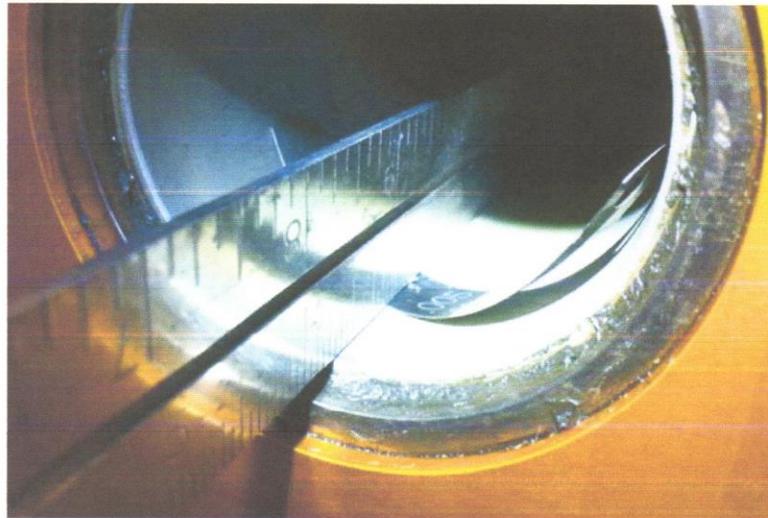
Inspecting Interior of Cross Tube for a Gap
